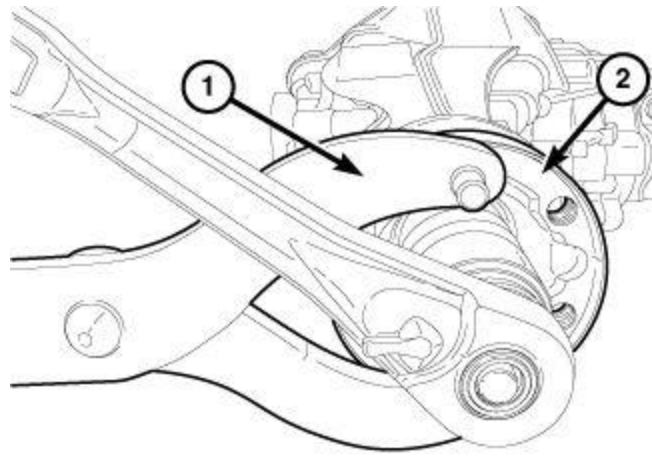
Pinion Flange, Pinion Shaft & Alignment Marks
